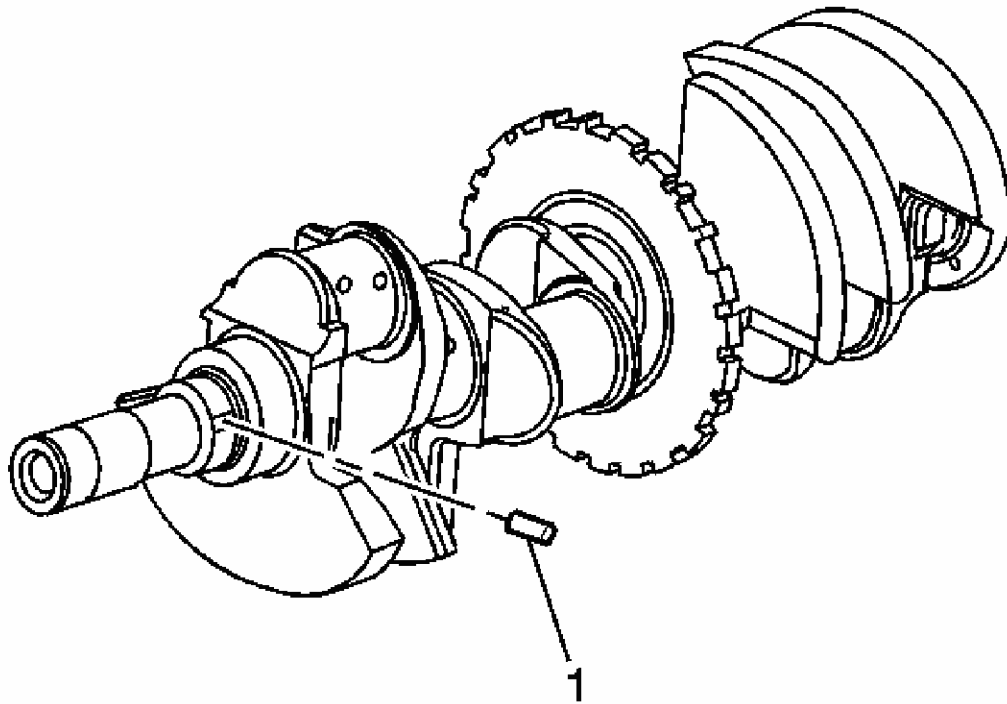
Identifying Crankshaft Sprocket Drive Pin
